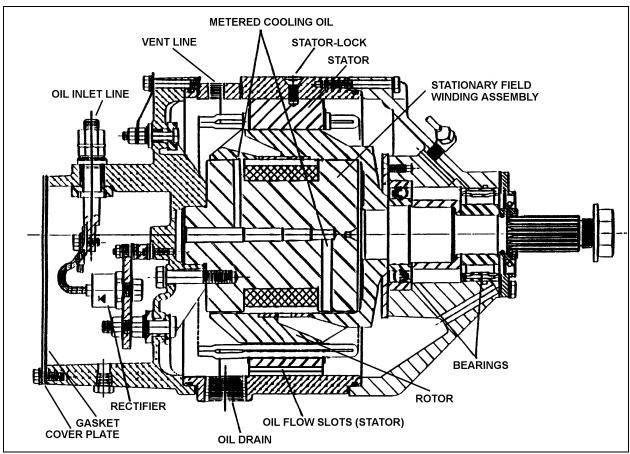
50DN DELCO ALTERNATOR SECTIONAL VIEW
